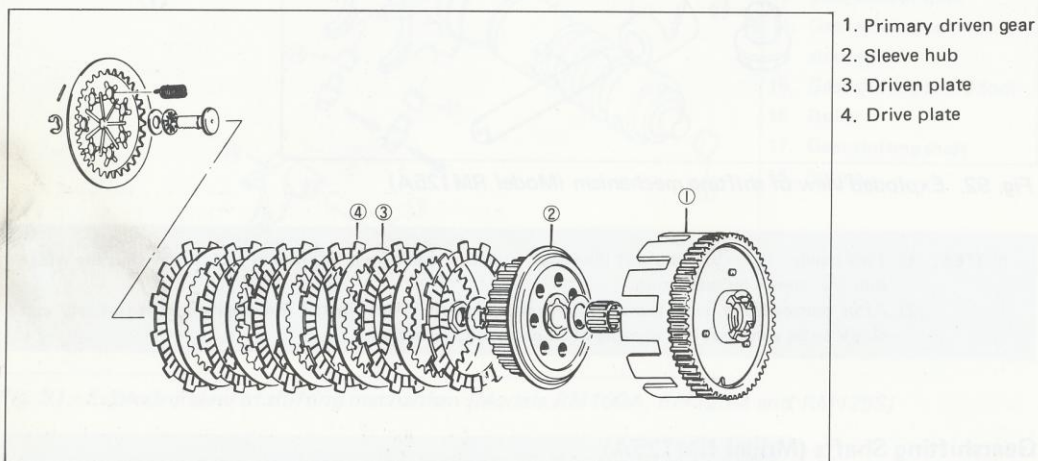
Exploded view of clutch (Models RM100A, RM125M & RM125S)
